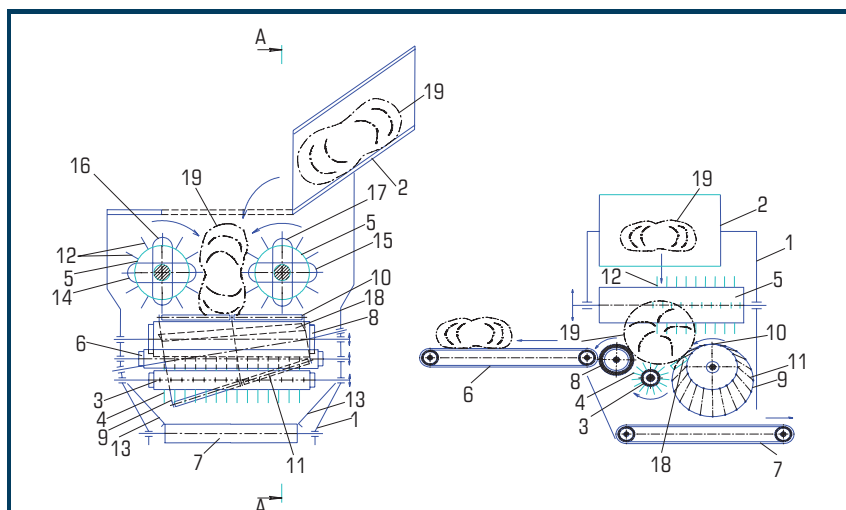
General view of the machine for removing rind from pumpkin fruits: 1 – frame; 2 – feeding tray; 3 – drive drum; 4 – brush; 5 – conveyor of peeled fruits; 6 – conveyor of peeled fruits; 7 – conveyor of the separated rind; 8 – rubberized roll; 9 – separator; 10 – upper generatrix of the separator surface; 11 – rod; 12 – tray; 13 – shield; 14, 15 – horizontal displacement grooves; 16, 17 – vertical displacement grooves; 18 – pusher; 19 – fruit
